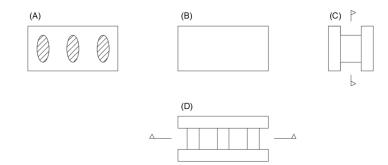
Representation of a block with 3 elliptical connectors; (A) Sectional view, (B) Main elevation, (C) Side elevation, (D) Top elevation.
